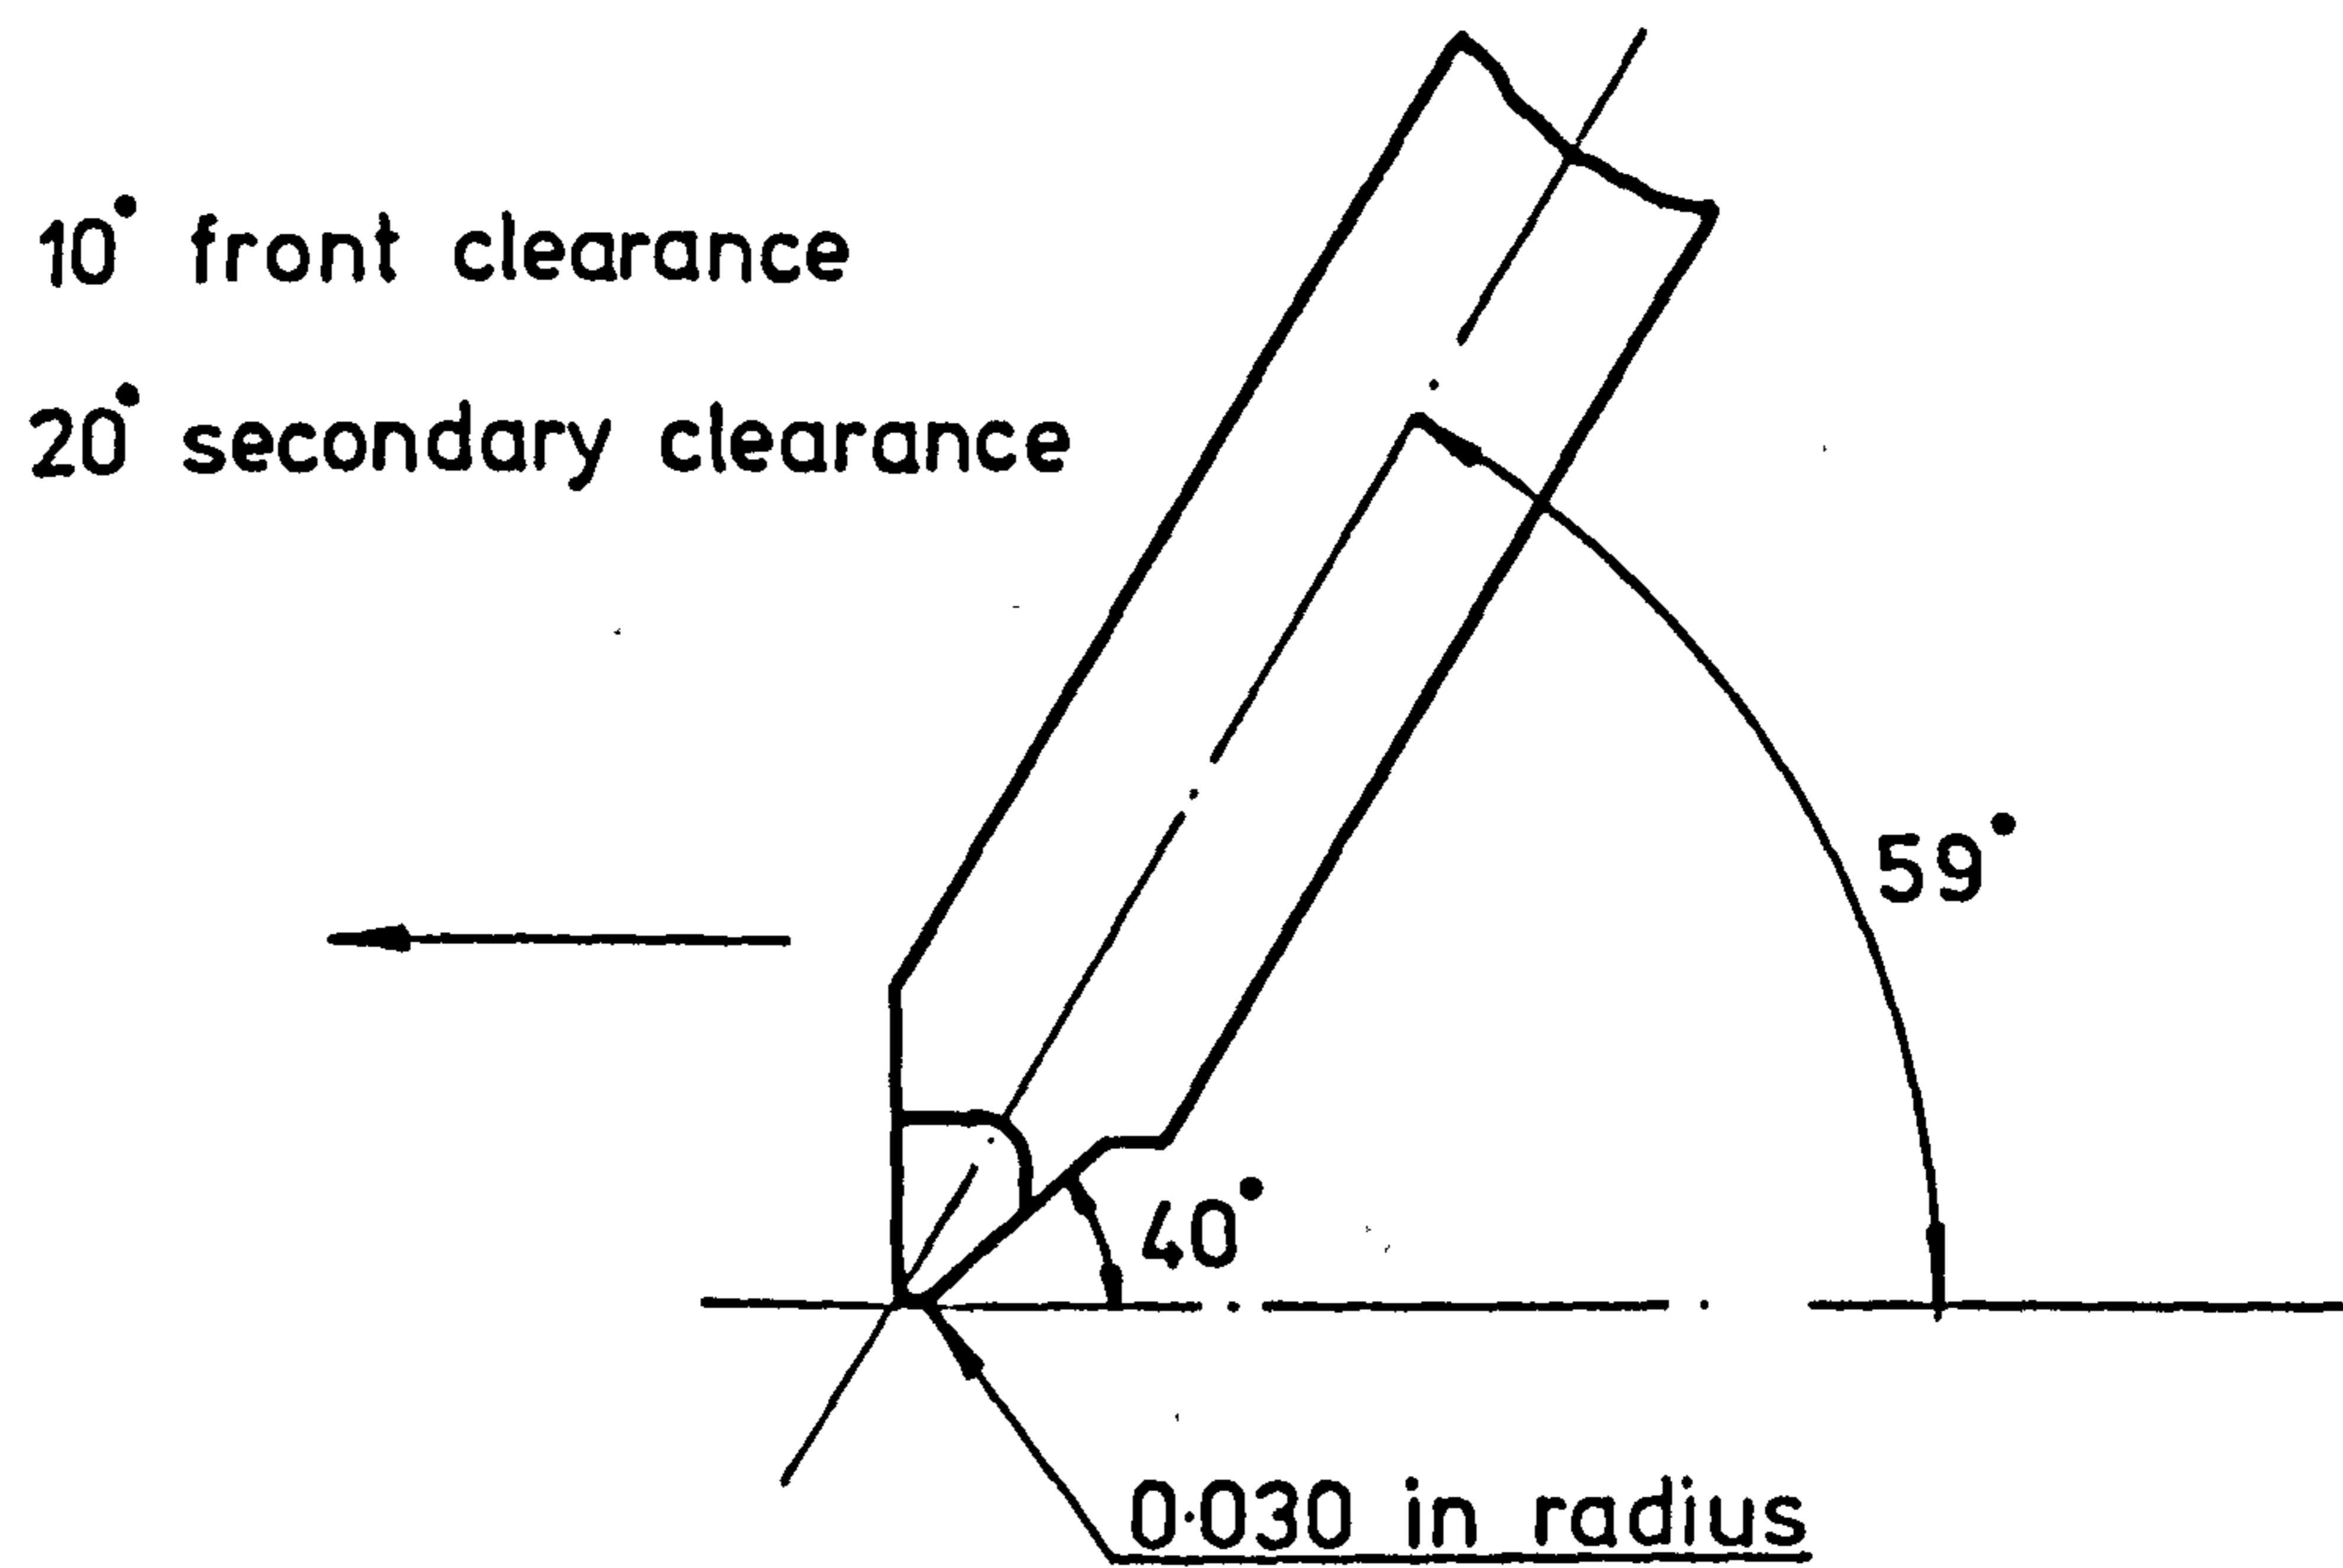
Geometry of Rolls Royce tool, designated as the R tool
